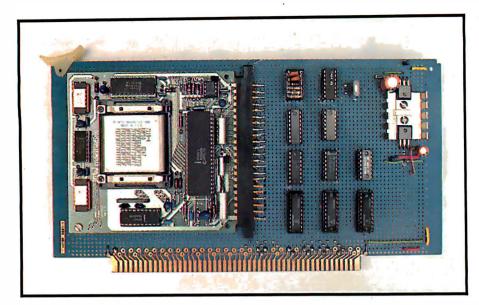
The completed S-100 bubble-memory board's component side with the BPK 72 installed (see figure 4 for the parts layout).
